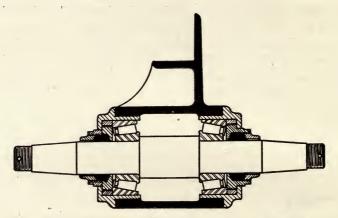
Diamond T Center Bearing Mounting for Divided Propeller Shaft.
